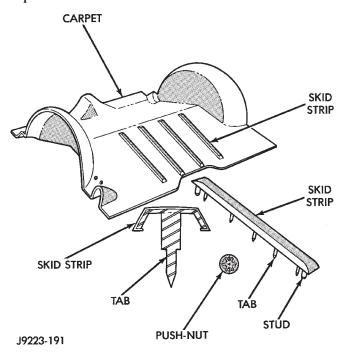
Rear Carpet Skid Strips—XJ Vehicles
